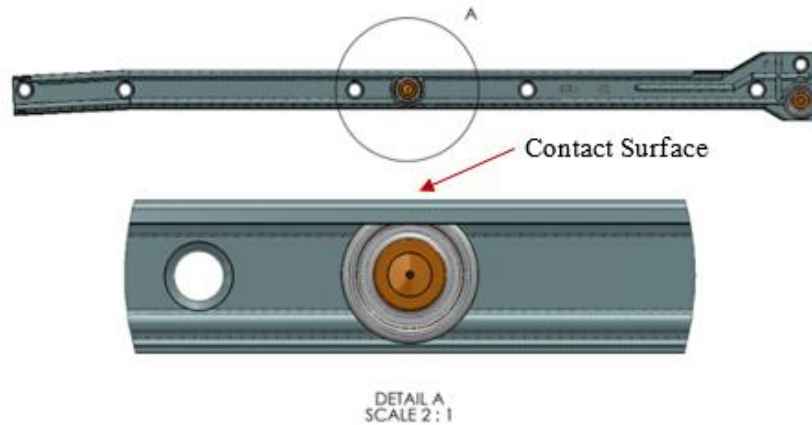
The wheel on the DL in step 2, the contact surface is on the upper side of the plate.
